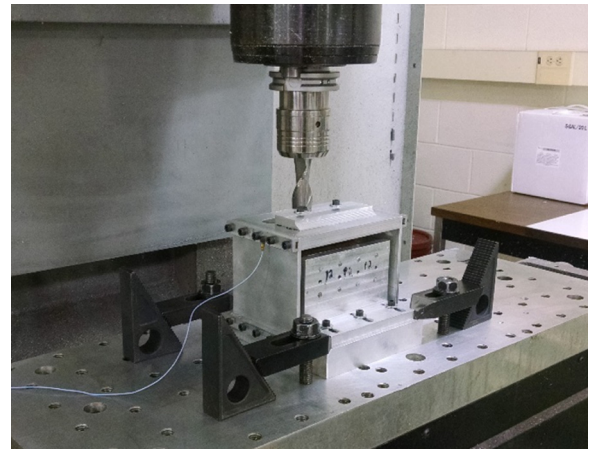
Milling setup showing damped flexure, two-flute endmill, and accelerometer.
